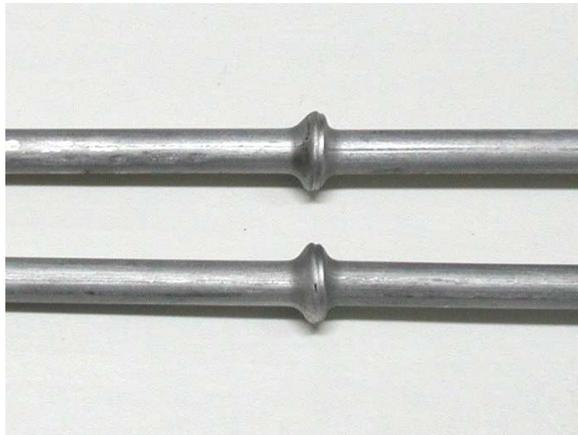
Macro-photographs of butt welded joint for investigated AMCs reinforced with 15 % of Ti_3Al
